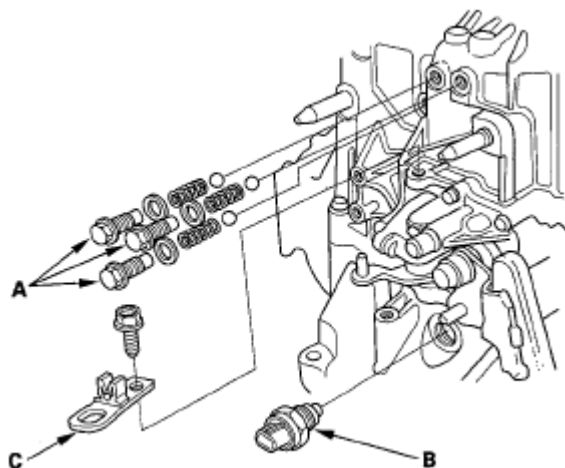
Identifying Detent Bolts, Springs, Steel Balls Washers And Back-Up Light Switch
